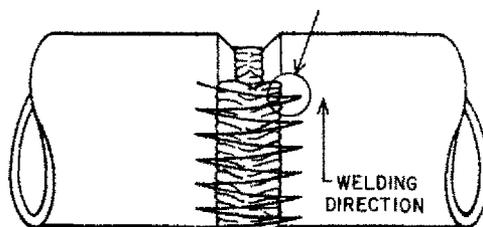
Semicircular weave used to weld the cover pass when welding small-diameter pipes by the uphill-welding method.
